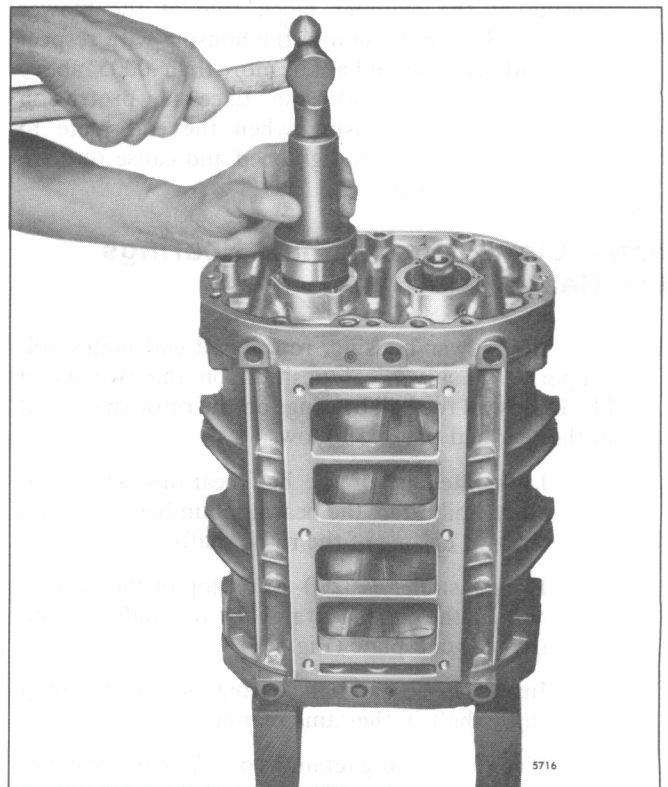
Installing Ball Bearings on Rotor Shaft and in Rear End Plate with Tool J 6270–13
